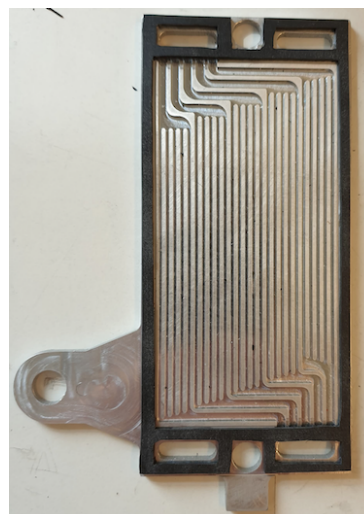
Illustration of the gasket assembled on a bipolar plate. Dimensions specified in appendix A.5.
